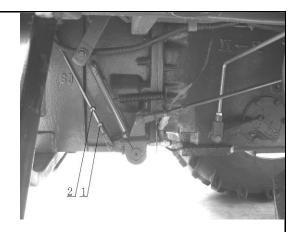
Adjustment on clutch pedal free path 1. Lock nut 2. Steering rod assembly
